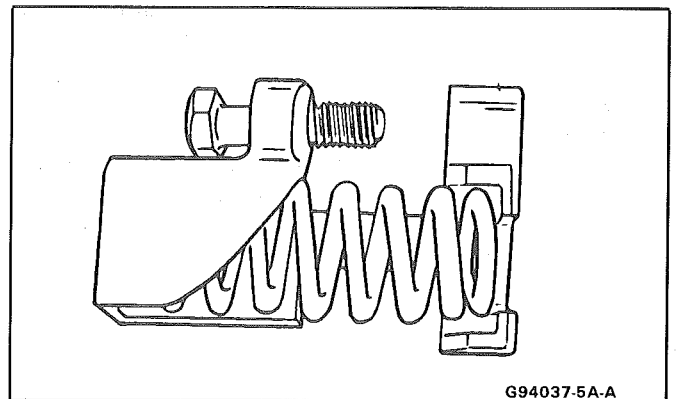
Spring Installed to J-28625 (Noncompressed)
